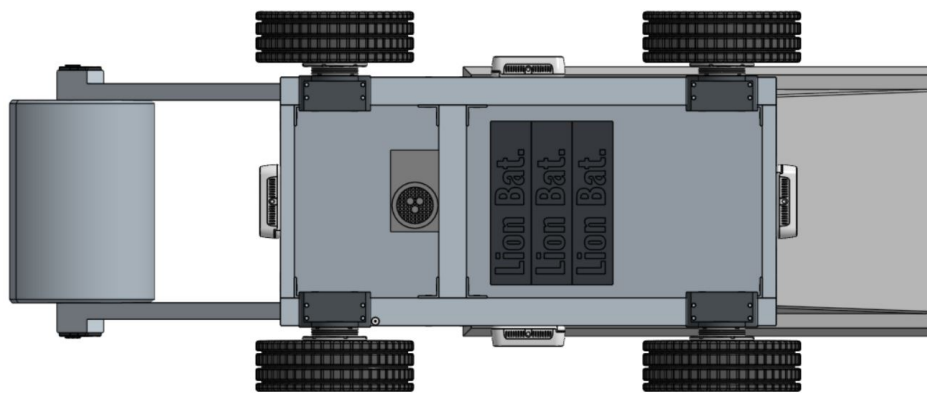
Rover bottom view. Bottom view of the rover design showing the chassis structure, wheel placement, drivetrain mounting locations, battery compartment, and underside component layout. The underside configuration was designed to provide structural support, balanced weight distribution, and stable mobility across uneven lunar terrain during regolith collection and tile transport operations.
